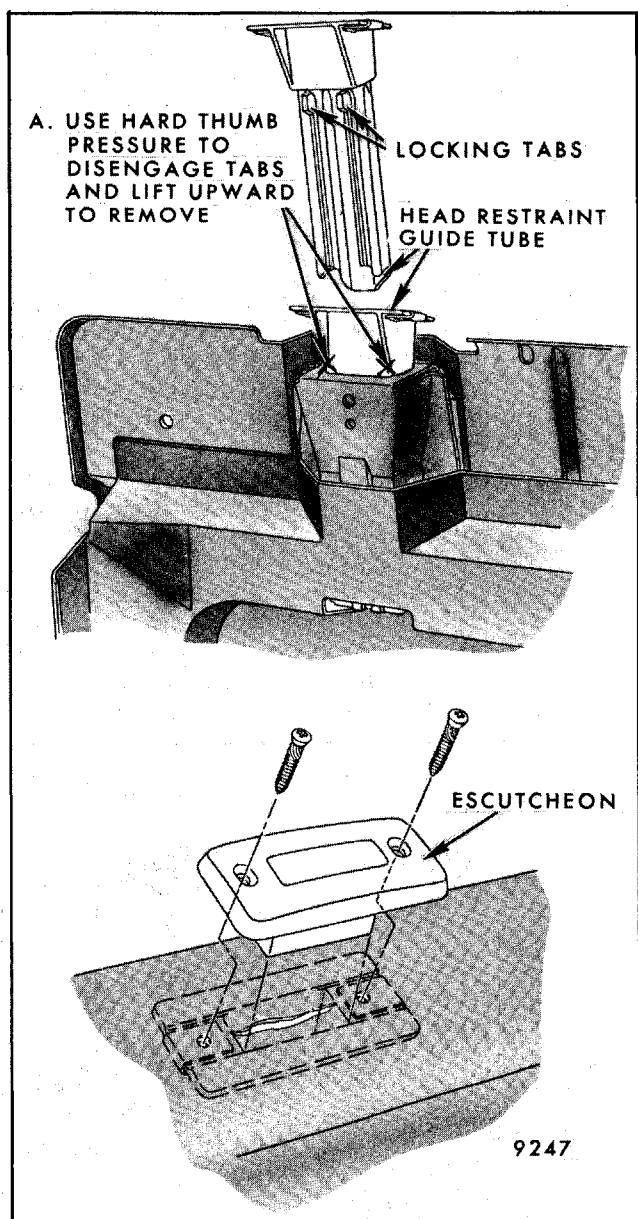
Head Restraint Guide Tube Removal - "B and C" Styles
